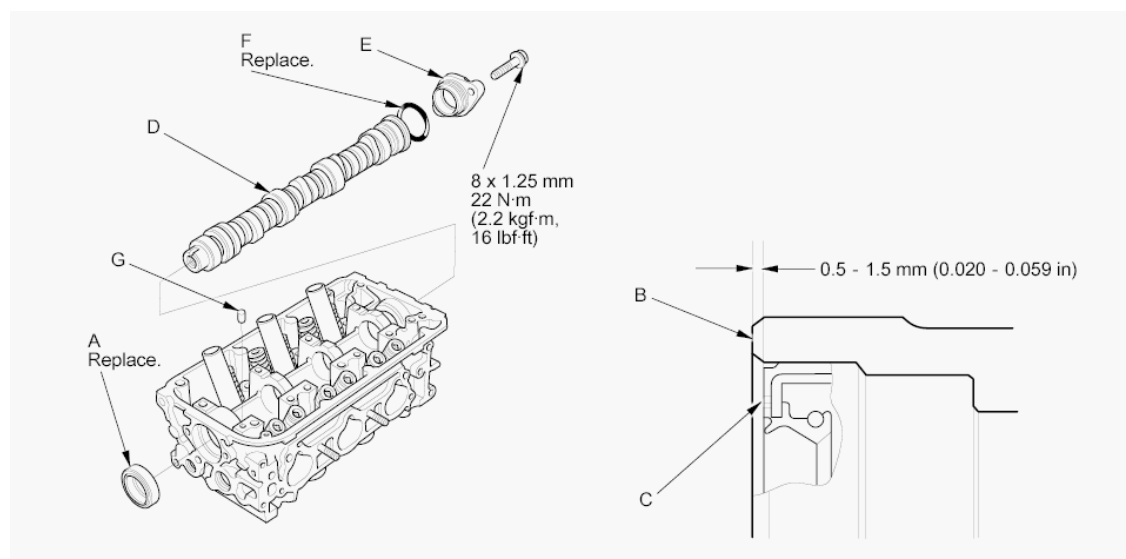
Identifying Camshaft, Thrust Cover, Oil Seal And O-Ring With Mounting Bolt Torque Specification
